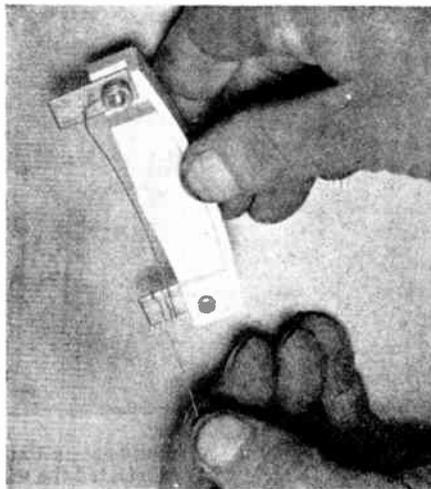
MENDING A FUSE. THE WRONG WAY.
